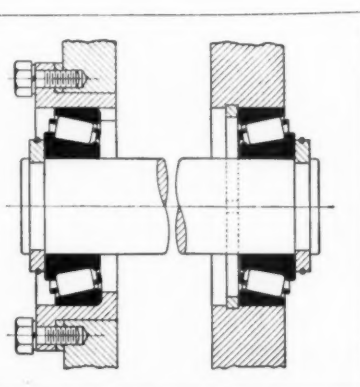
Typical Example of Indirect Mounting of Tapered Roller Bearing
